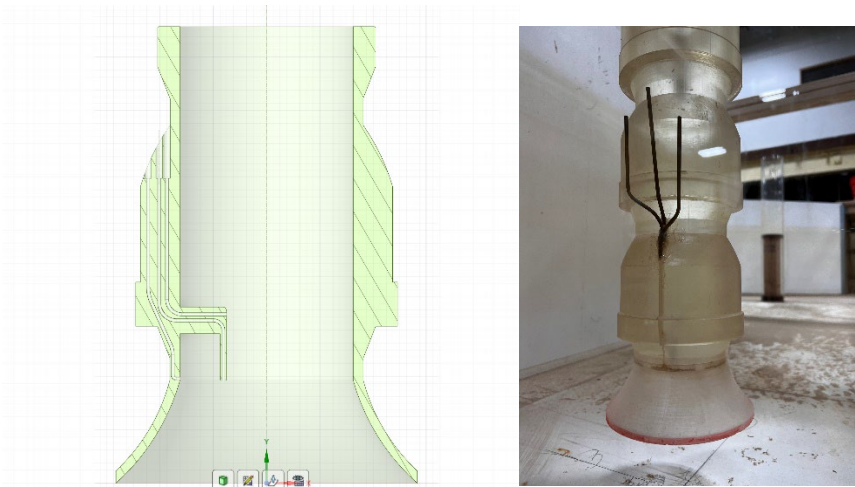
Left, cross section of the pitot tube pump bell. Right, 3D printed pump bell with piping installed.
